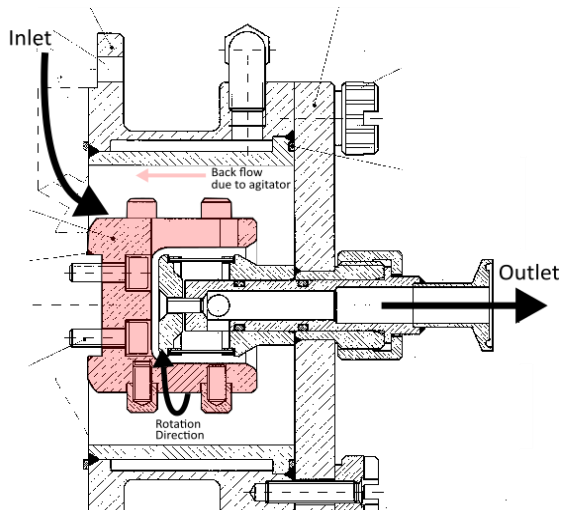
Cutaway view of a 0.25 L horizontal mill. The portion that is highlighted red shows the agitator or impeller. Product flows in from the inlet and exits the outlet.
